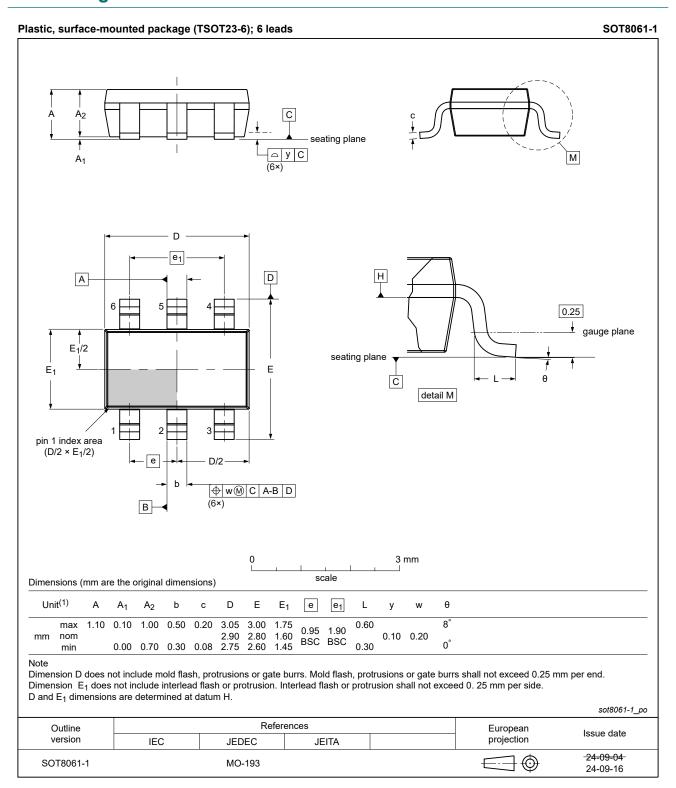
Package outline SOT8061-1 (TSOT23-6)
